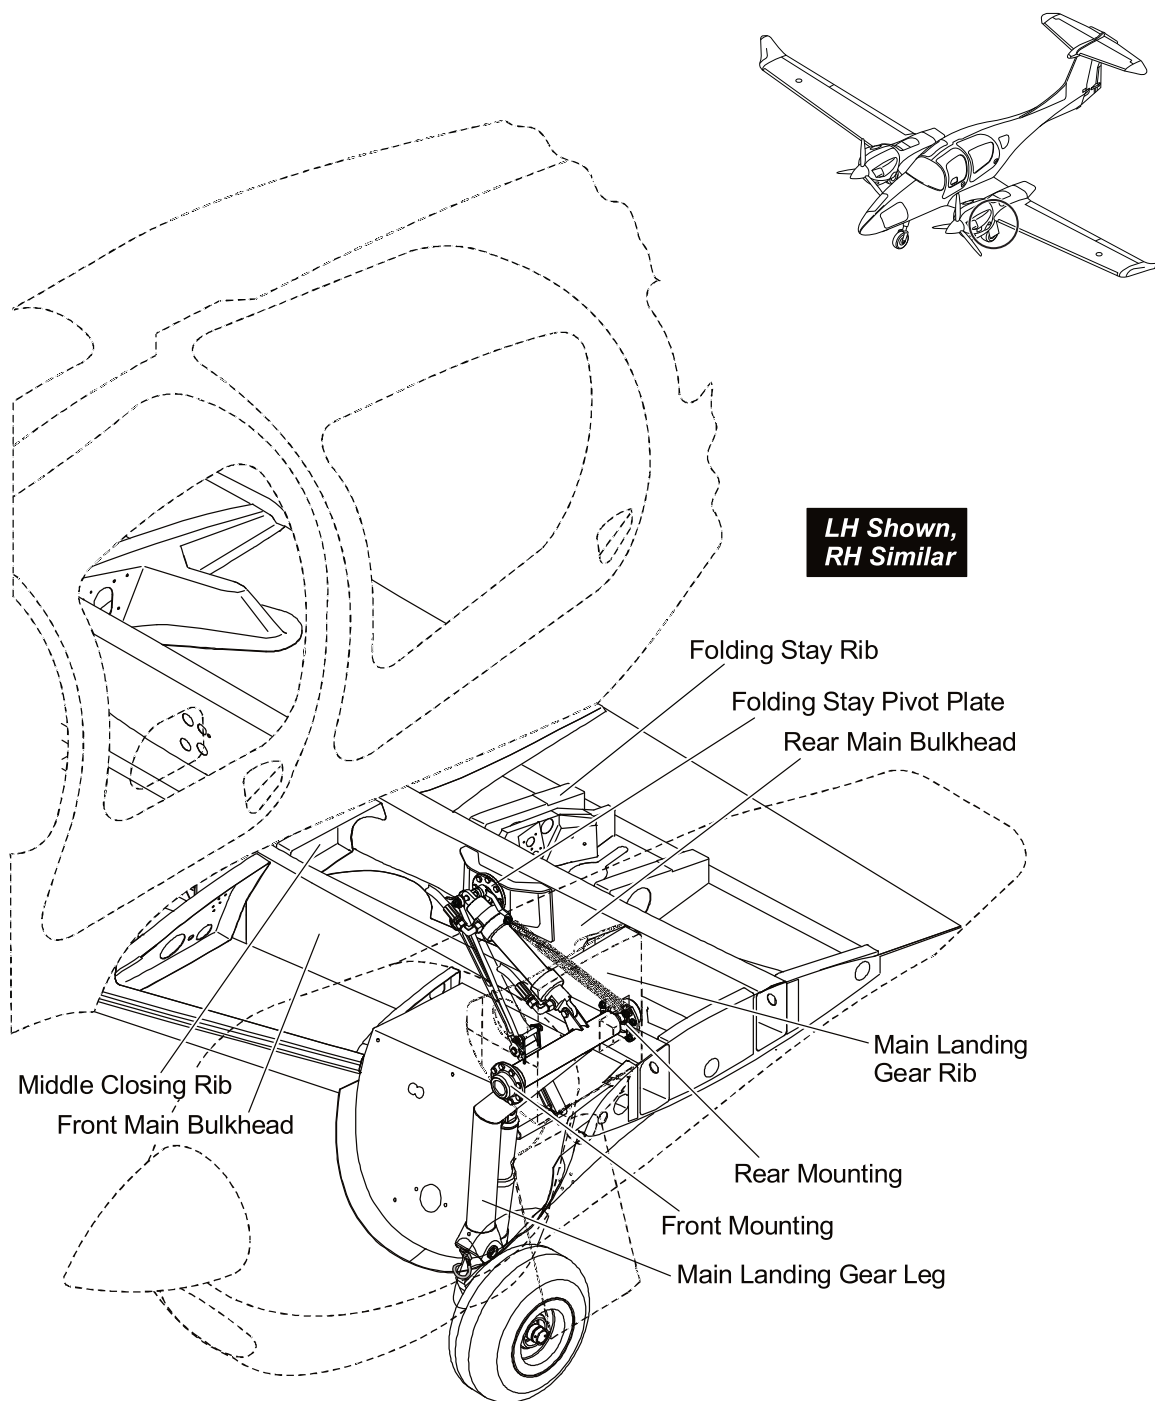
Hard Landing Check Areas - Main Landing Gear
